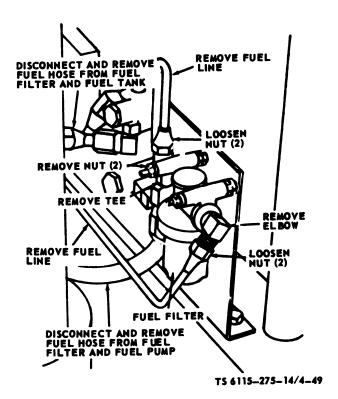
Fuel hoses, lines and filter, removal and installation (all serial numbers except MA68-0001 thru MA68-2987) (Model MEP-018A).
